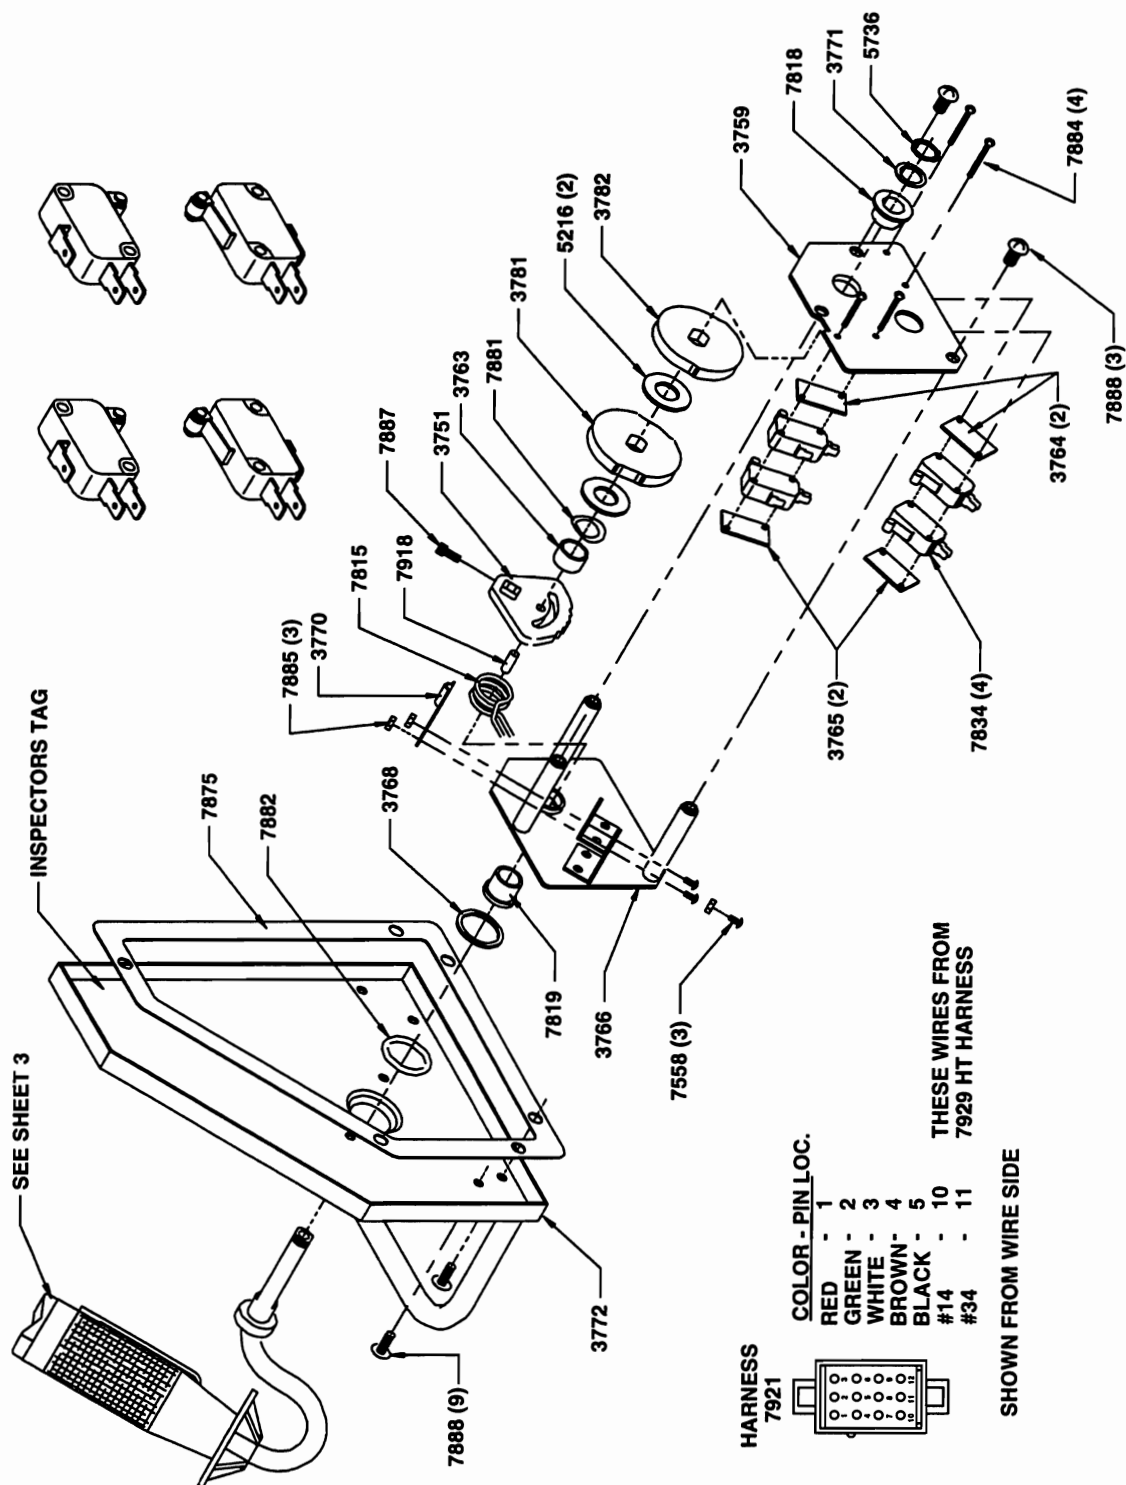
Optional Upper Control Box Assembly - Electric Units (Sheet 3 of 5)
